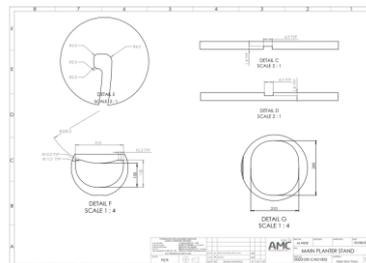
Drawing - 0022-DE-CAD-005 - PLANTER STAND pg2
